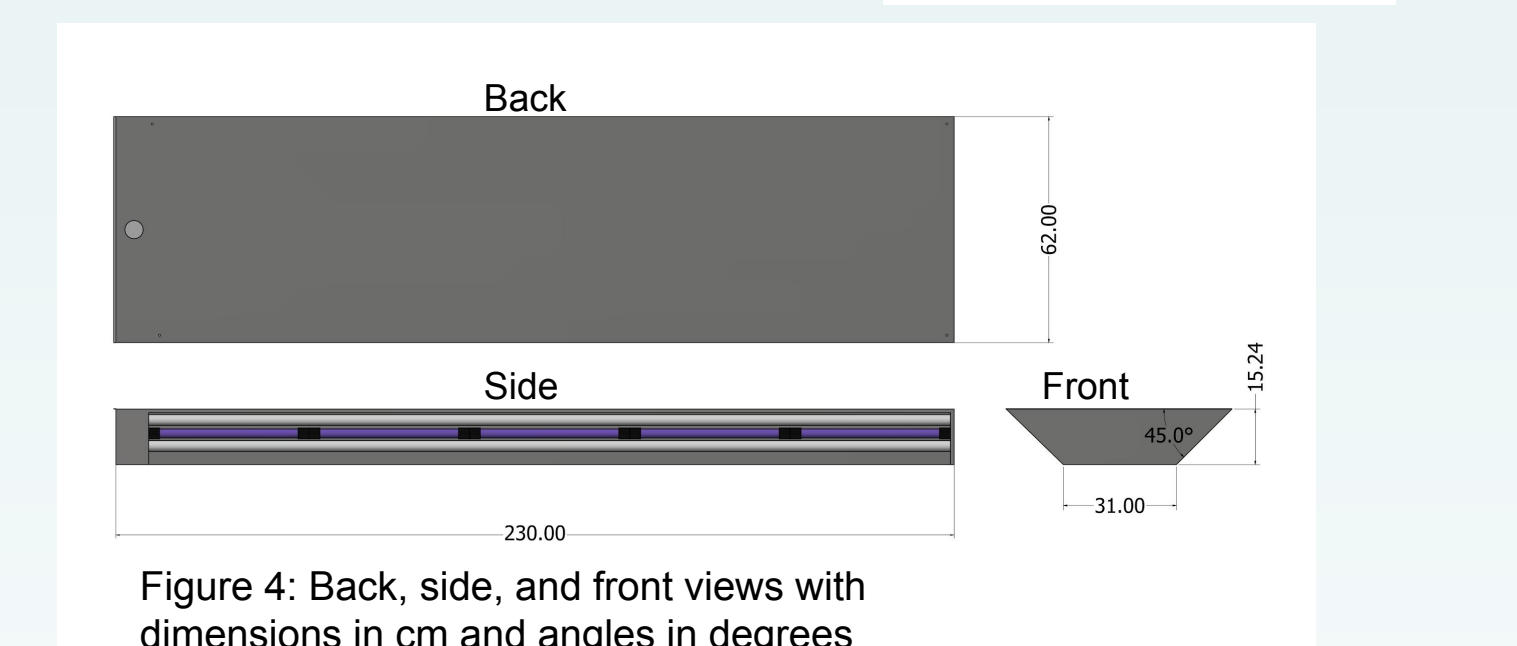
Back, side, and front views with dimensions in cm and angles in degrees
